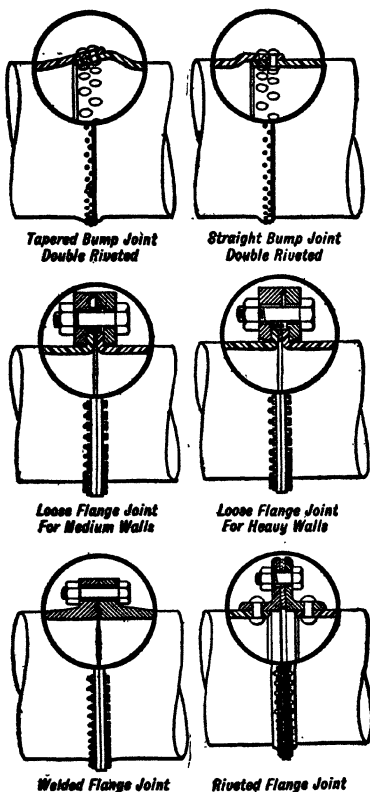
Typical Joints for Welded Pipe
